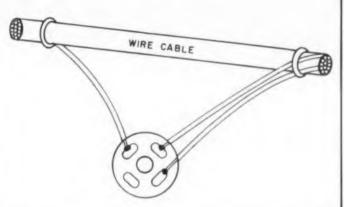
The terminal plate can be soldered into cables as part of the harness assembly.
